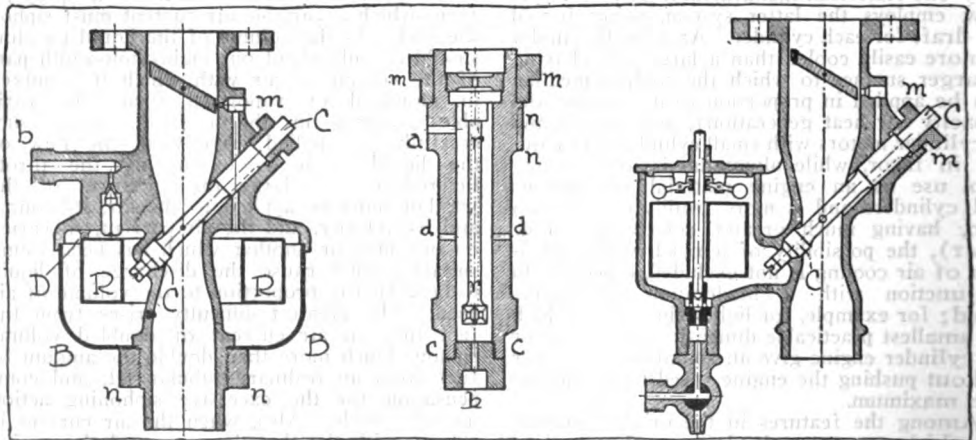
Sectional views of carburetor of German design. At left, the pattern having float chamber BB surrounding the choke-tube (venturi-tube); in middle, larger scale view of oblique jet (cc) dipping into fuel supply at lower end adapted for drawing air at upper end to mix in form of air bubbles with spray of fuel at dd when throttle is open (it is shown closed). At right, same carburetor with float chamber at the side, as preferable if used for heavy fuels requiring adjustment of the float to raise level of fuel and bring it nearer to spray apertures dd.
